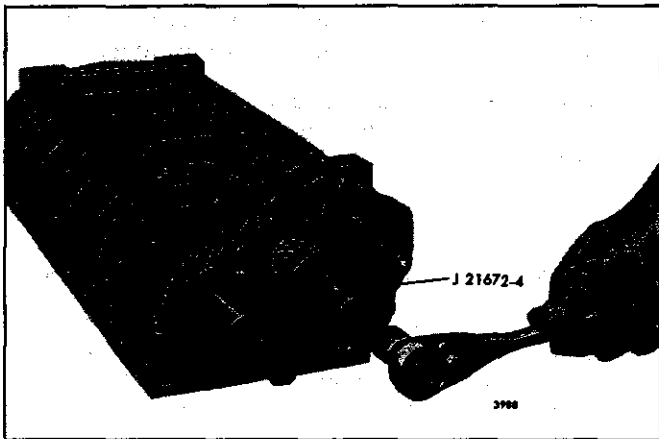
Removing Rotor Gears Using Tool J 21672-4
